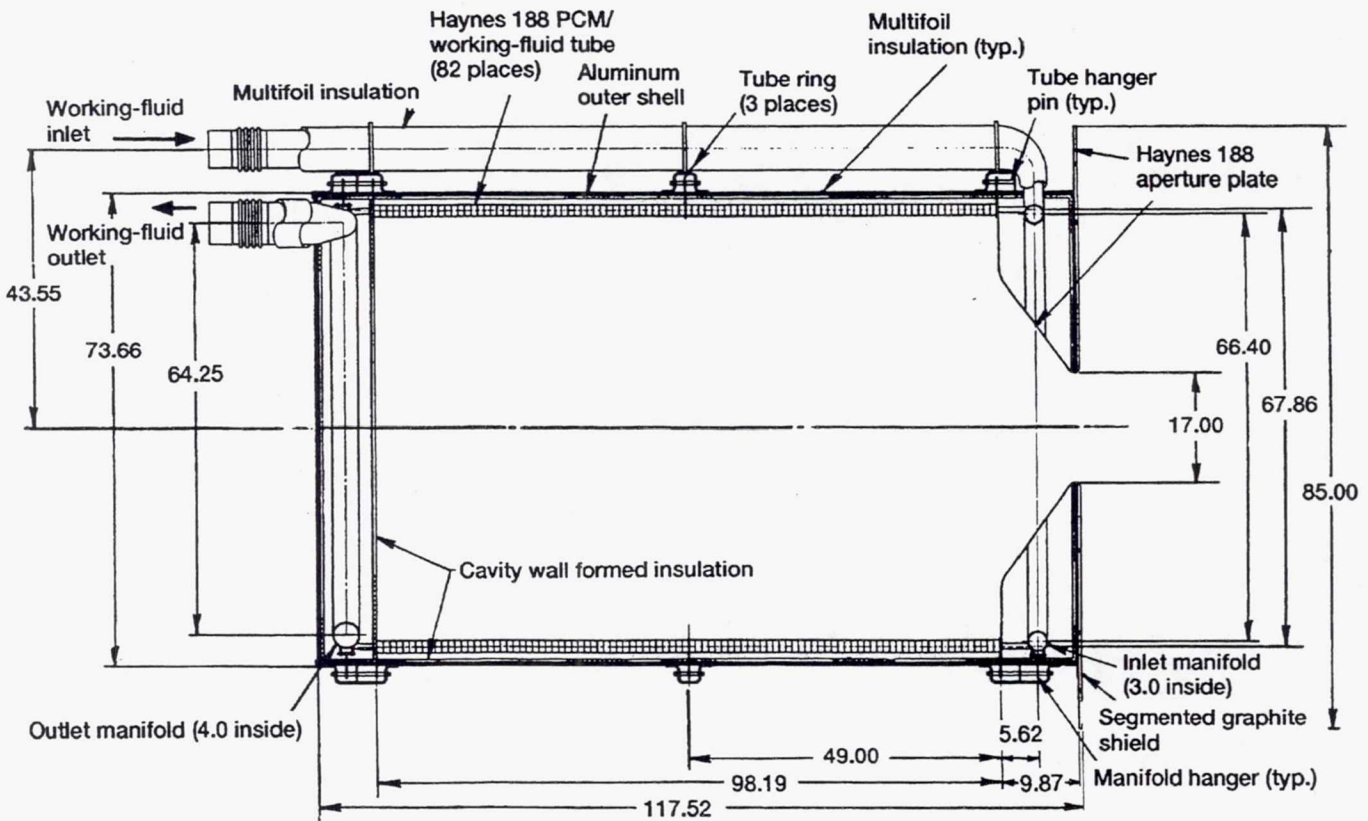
Solar heat receiver layout. (Dimensions are in inches.)
